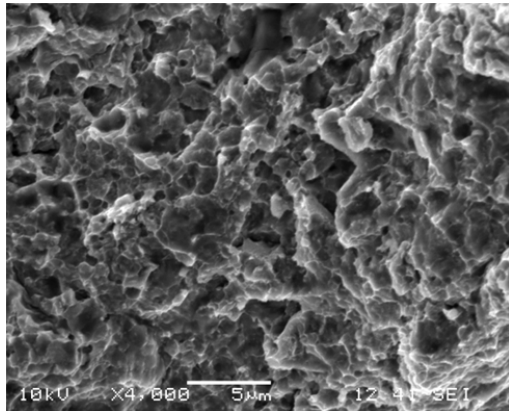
(b) Fracture surface in FSW tensile tested specimen
